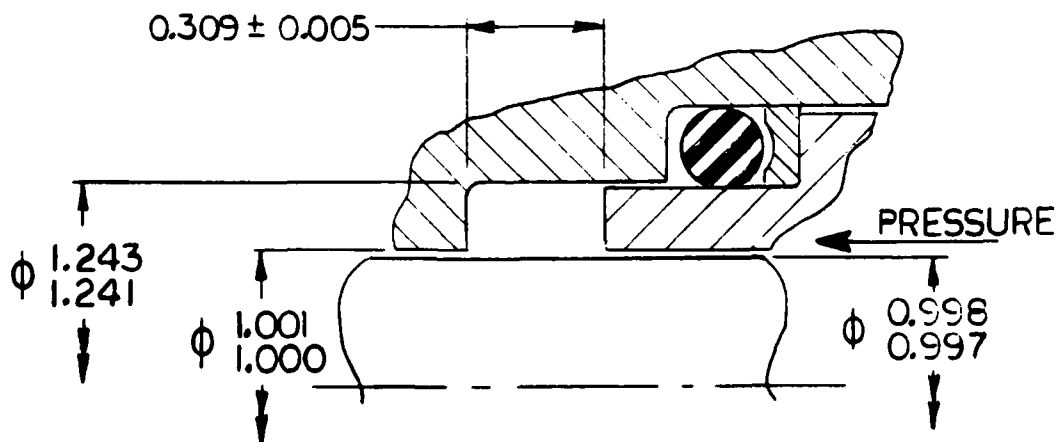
ROD TEST FIXTURE GLAND DIMENSIONS
